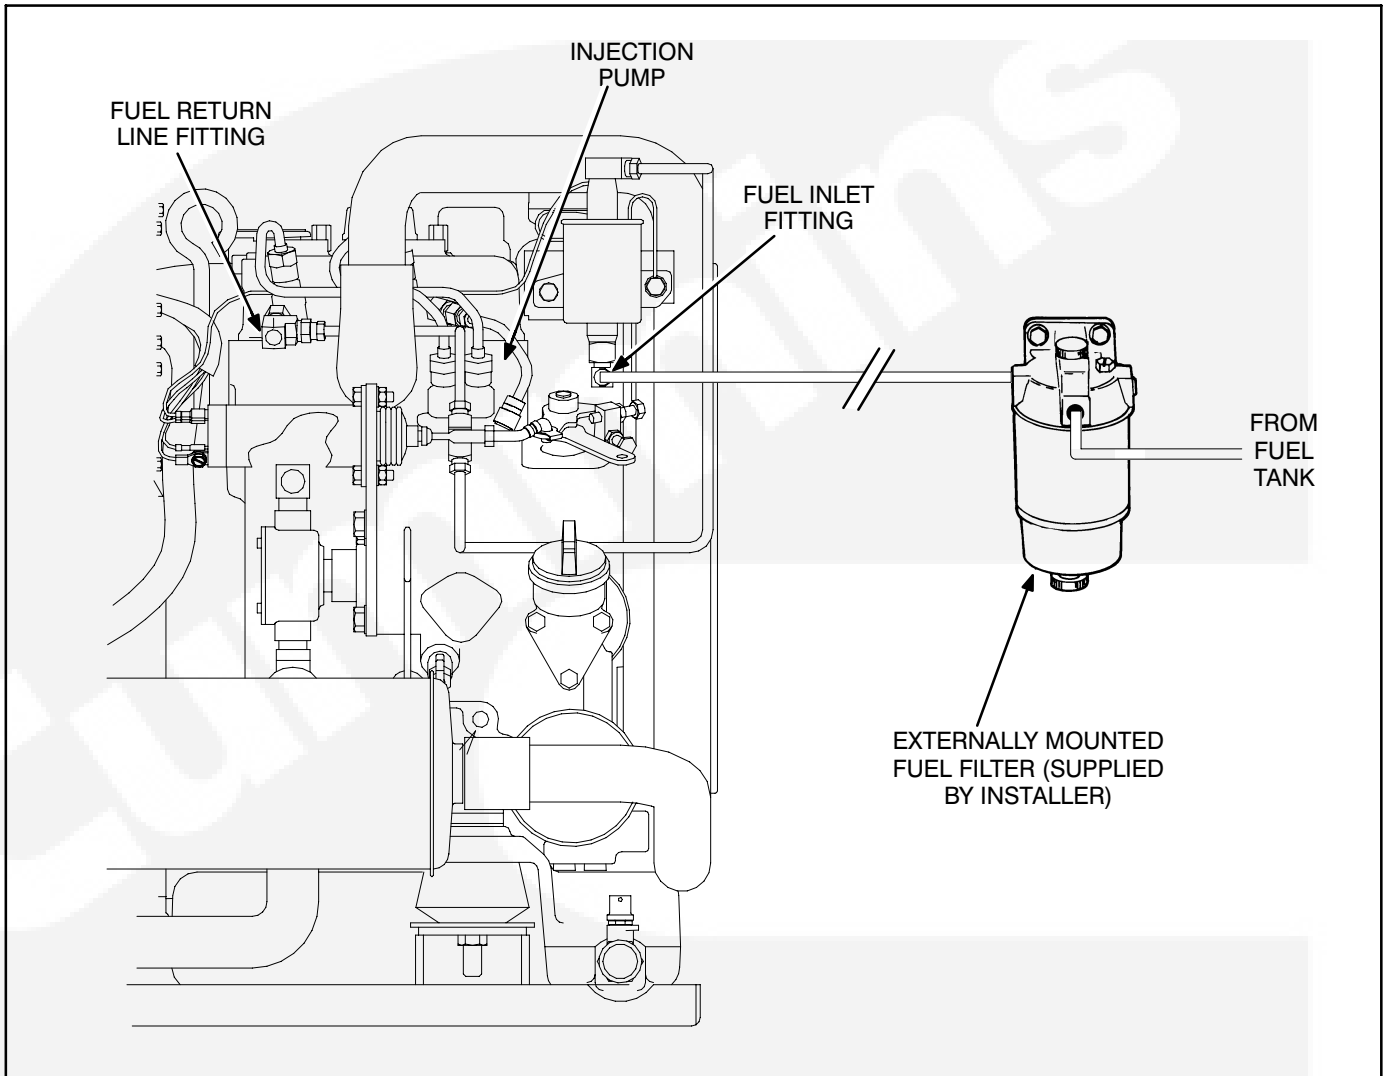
INJECTION PUMP FUEL SYSTEM
